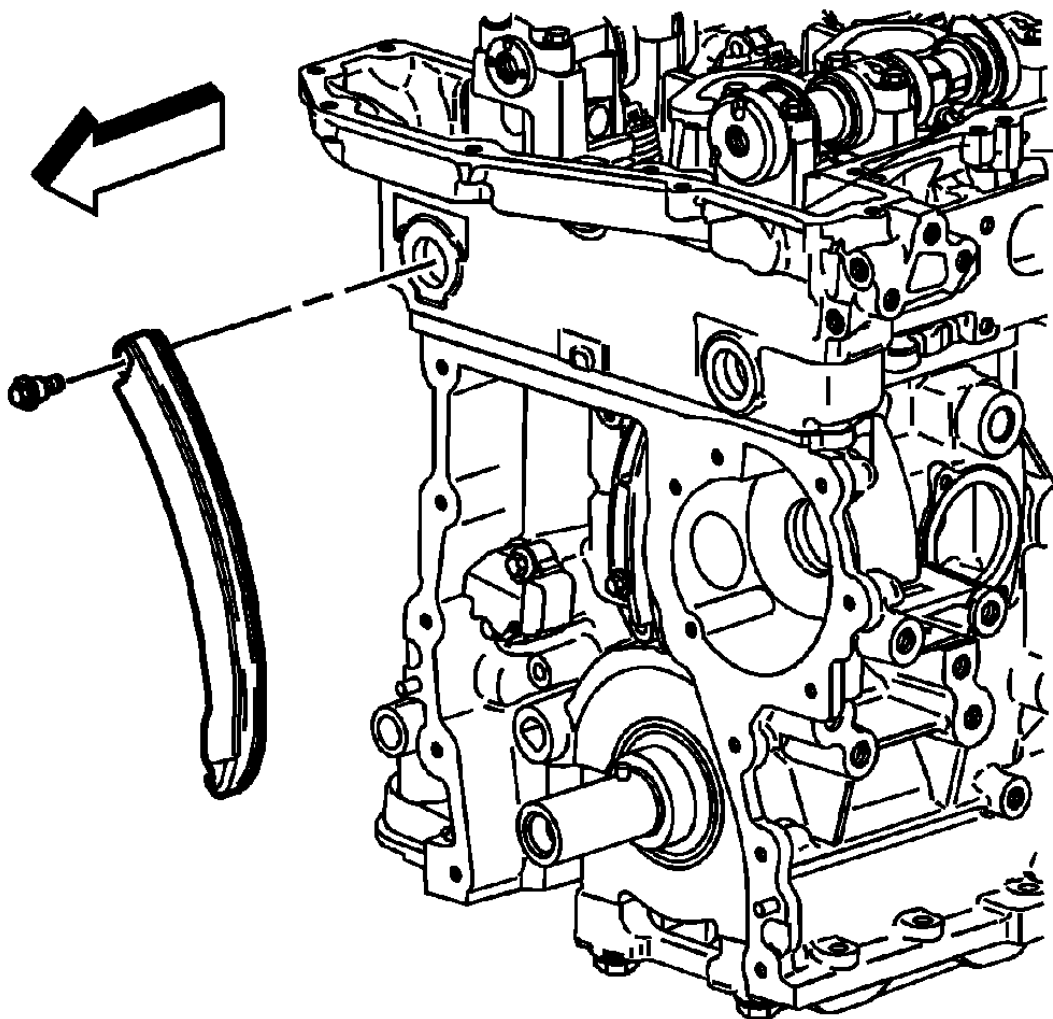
View Of Timing Chain Tensioner Shoe & Bolt
